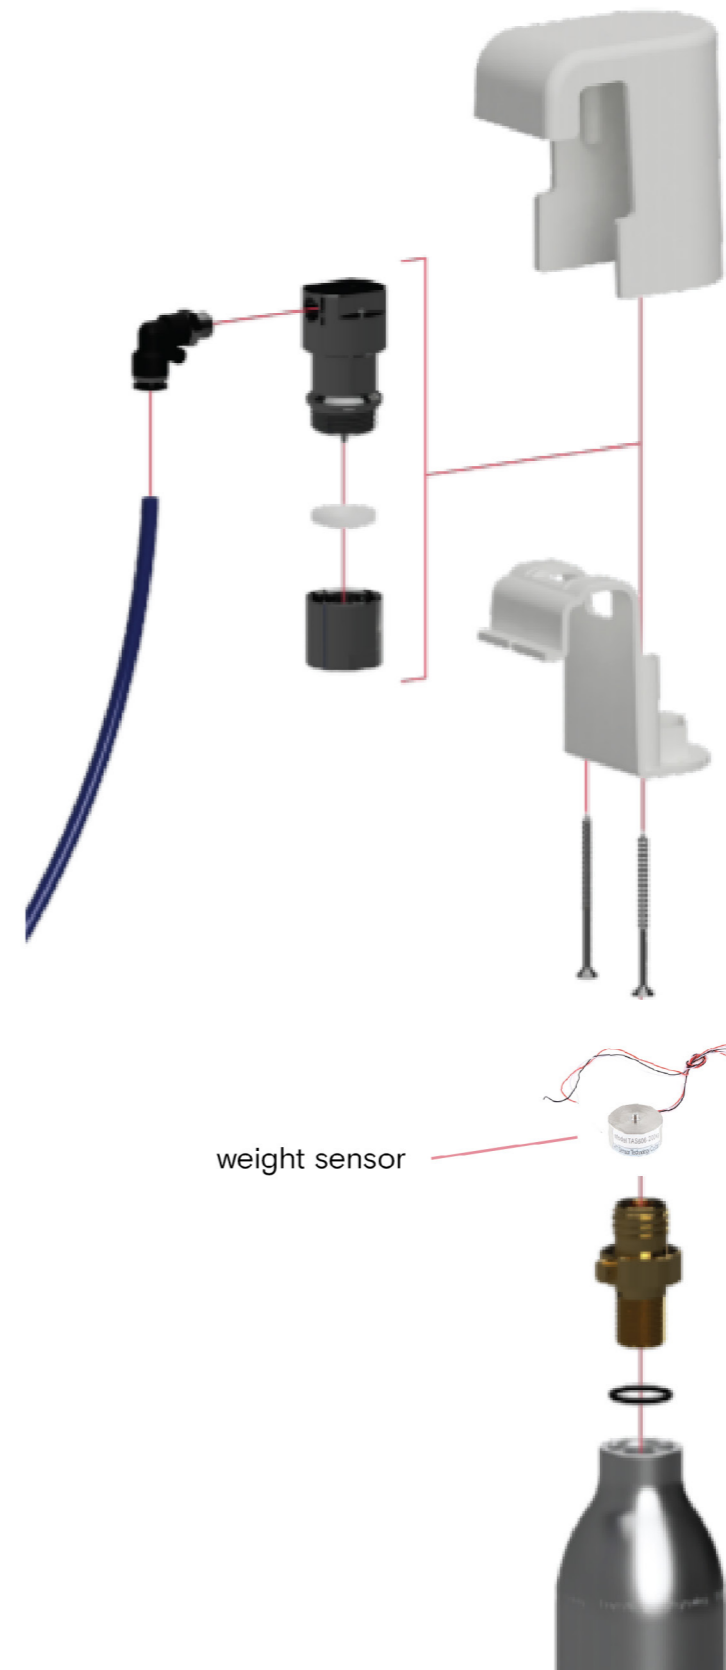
Exploded view of the connector with weight sensor. Adapted from *Designing the CO2nector*, Eekhout, den Hengst, Hoeksma, Kolk, Rietveld, & Risseeuw, 2019.
